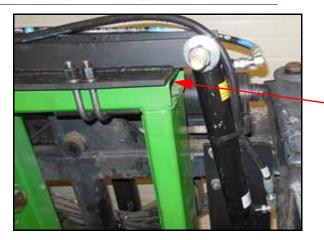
Upper Cylinder Mounting Bracket Aligned with Center Frame
